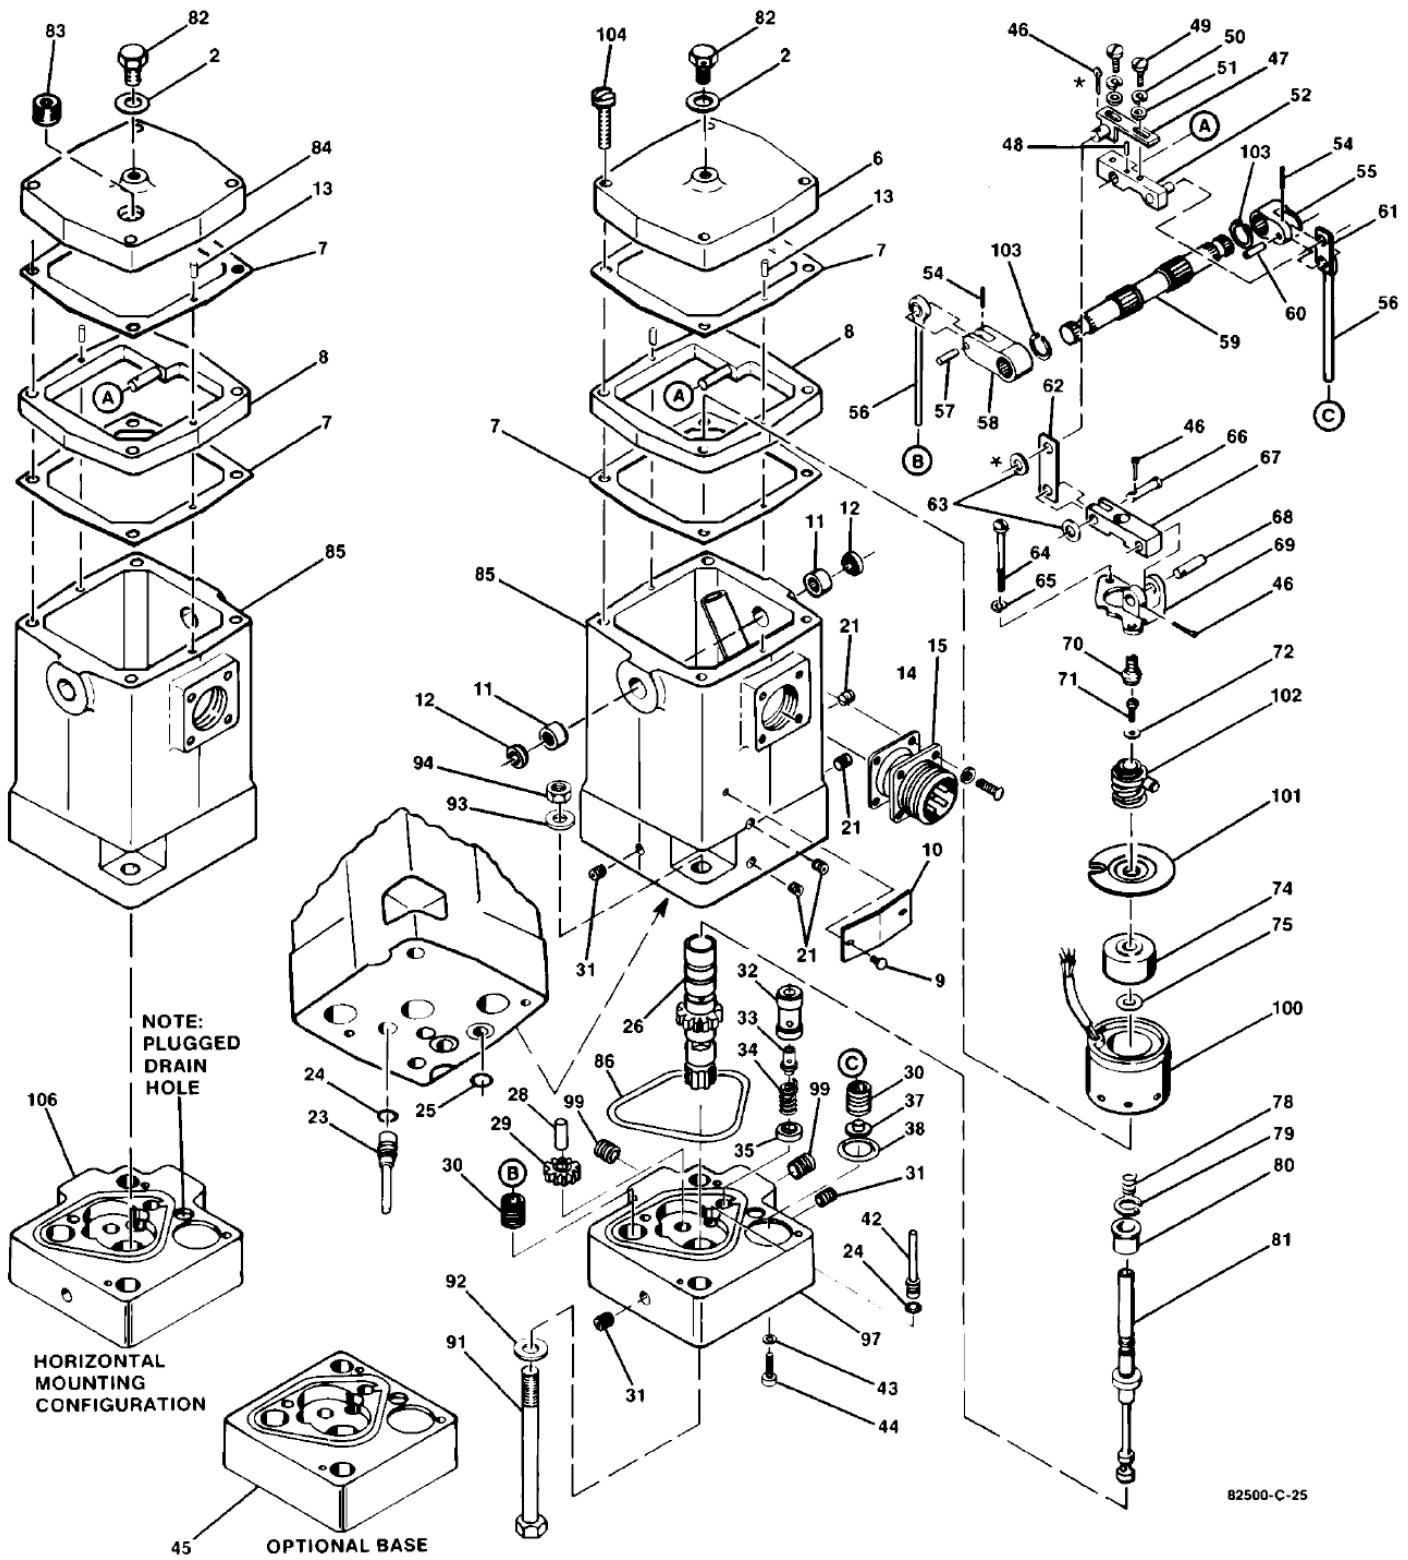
Exploded View (EG-3P with Gear Pump)
